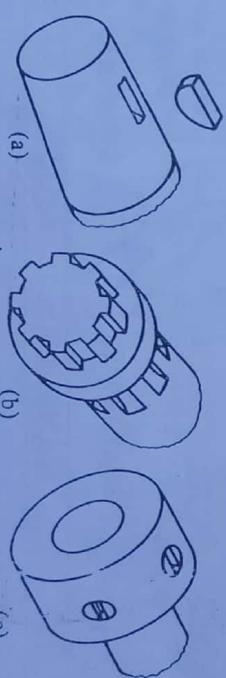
(a) Woodruff key, (b) splined shaft, and (c) grub screws
